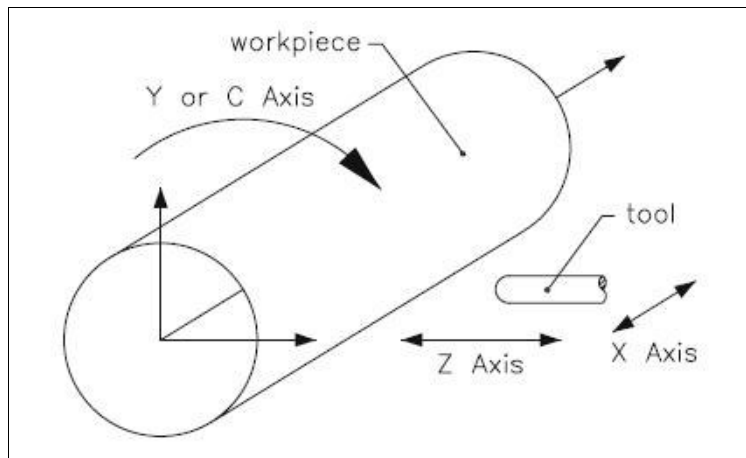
Common axis configuration for 3-axis lathe[37]
